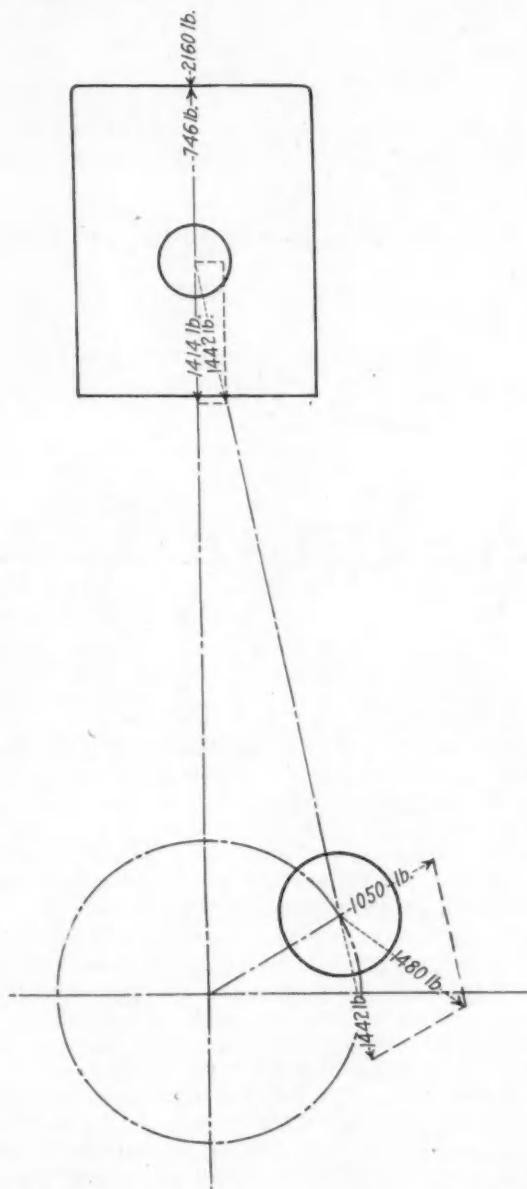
STRESS ON ONE POSITION OF CRANKSHAFT ON POWER STROKE
